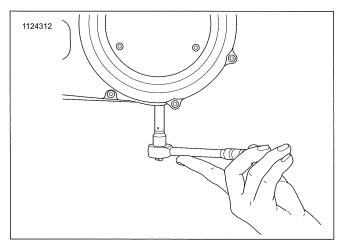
Removal/Installation of Chaincase Drain Plug
